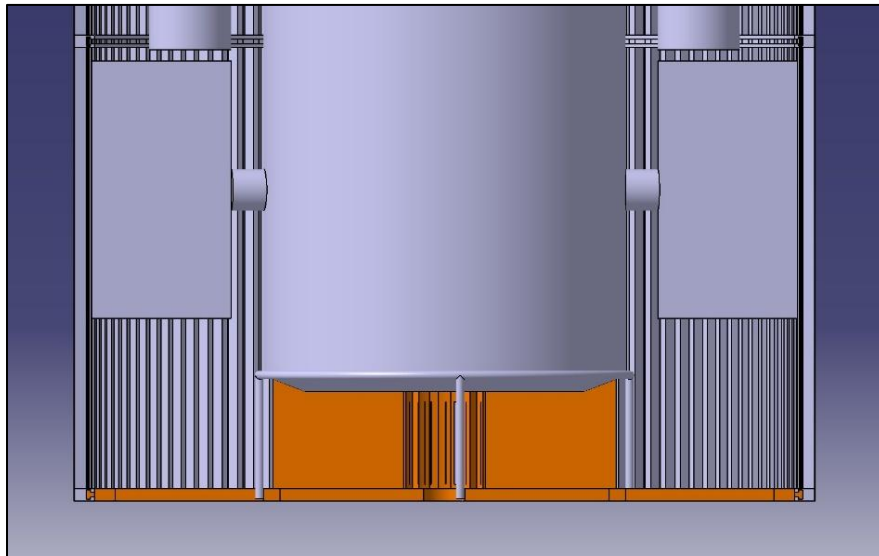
Bottom Fixture Shown with Zvezda and Starship
